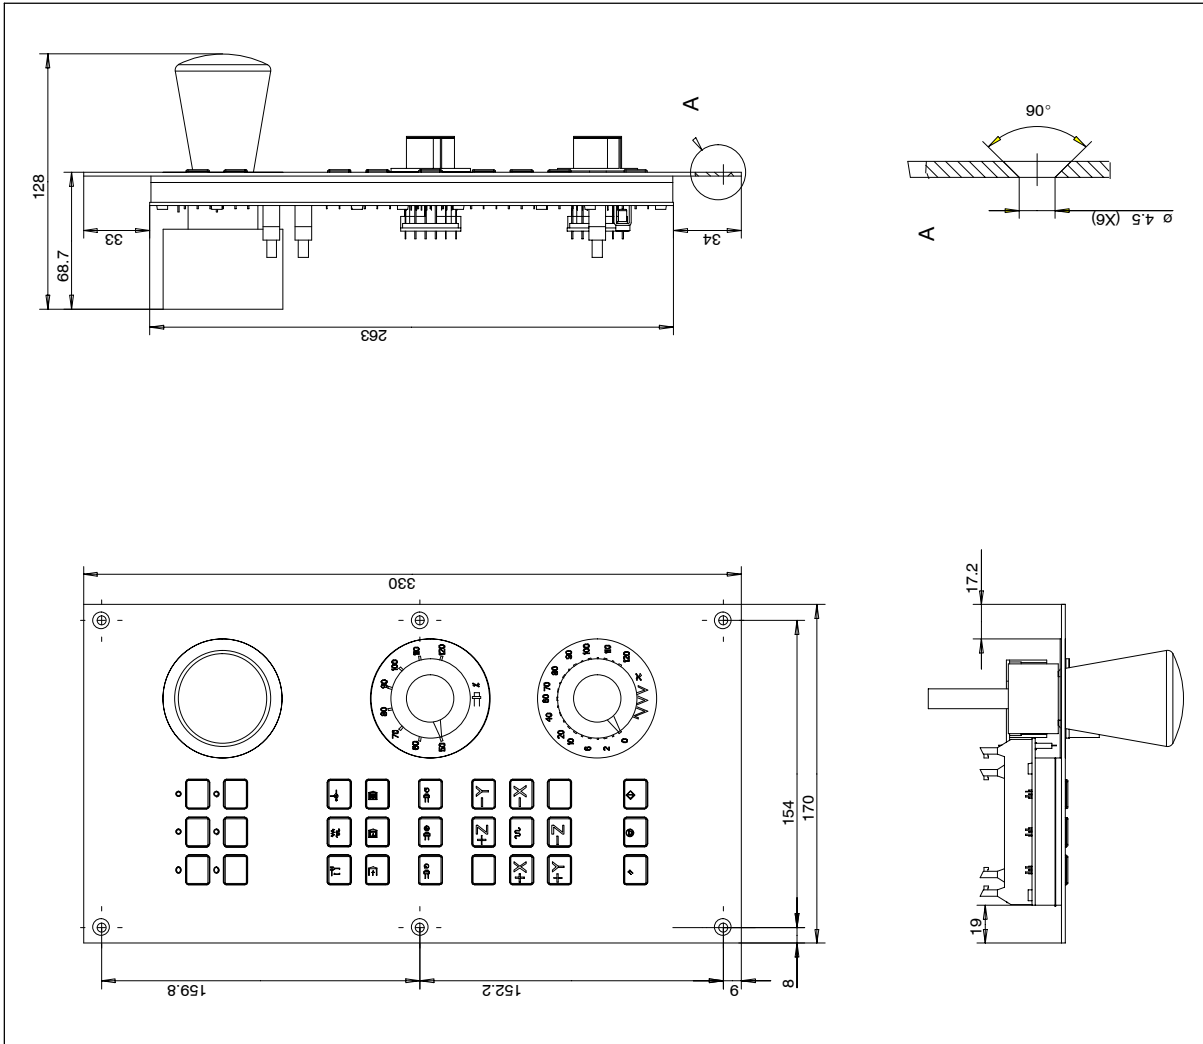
Mounting dimensions for the machine control panel (MCP)
